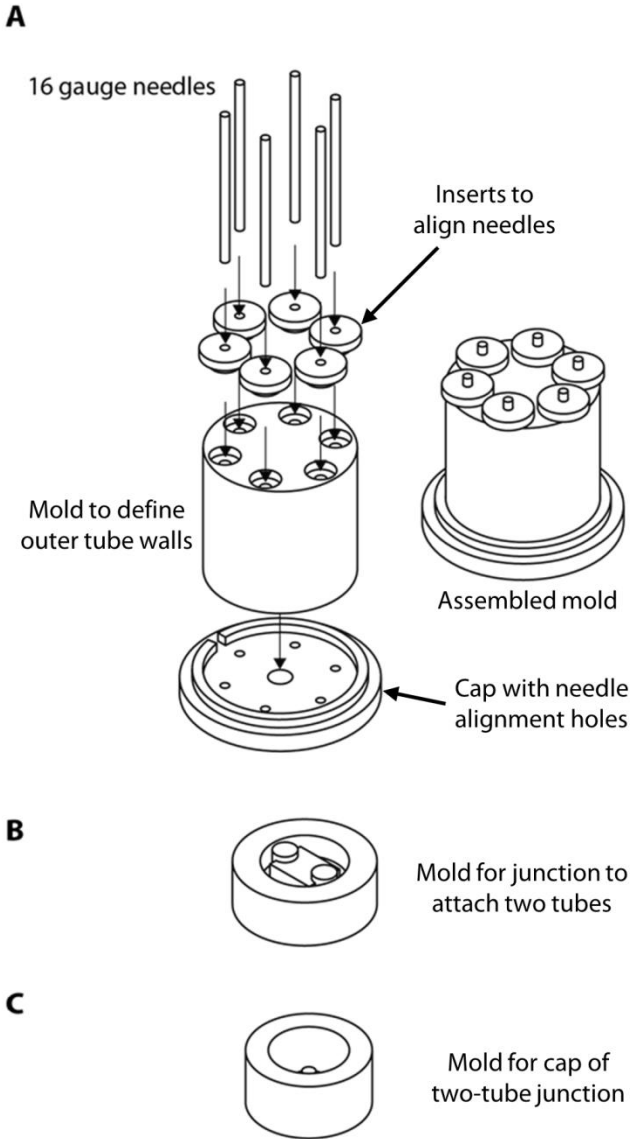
Design of the molds for the tubing used inside the chambers of the inverter. (A) Assembly of the mold to fabricate six tubes, simultaneously. (B) Mold for the connecting junction that attaches two tubes (between the tubing and the conical tip). (C) Mold for the conical tip that serves as a cap for the two-tube junction in (B).
